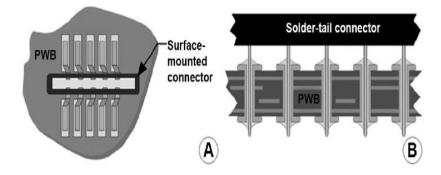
Two common methods of soldering on PCBs: (A) SMT, and (B) PTH [42]
